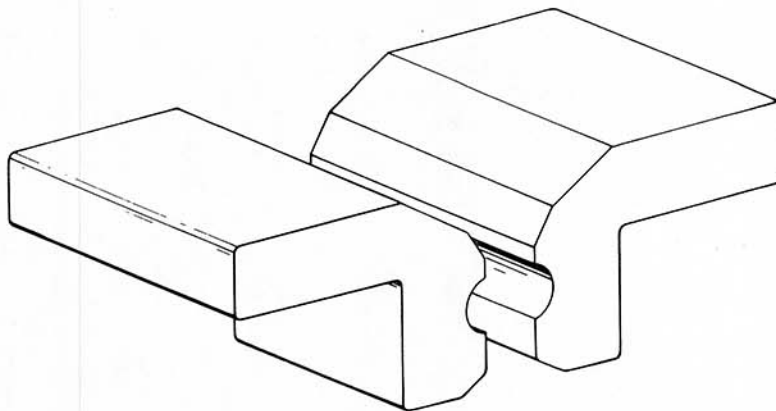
Barrel Removal Vise Jaws (P/N 62695).
